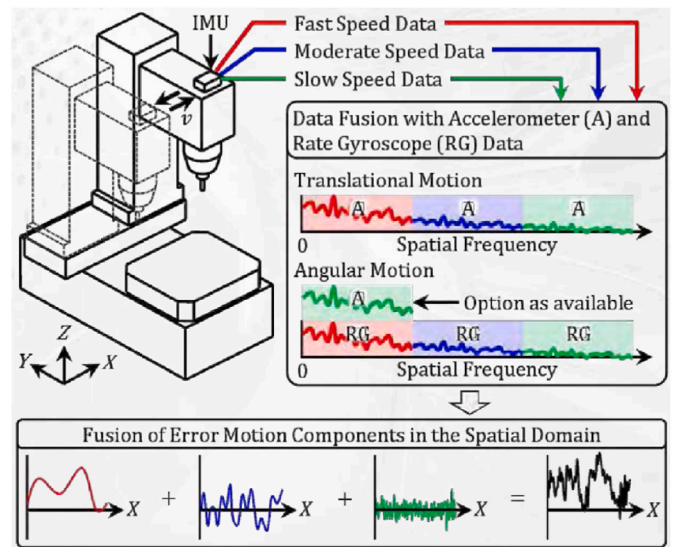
IMU-based method for diagnostics of machine tool performance degradation [522]. IMU sensors are integrated with machine slides to continuously detect the changes in slide positioning errors.
